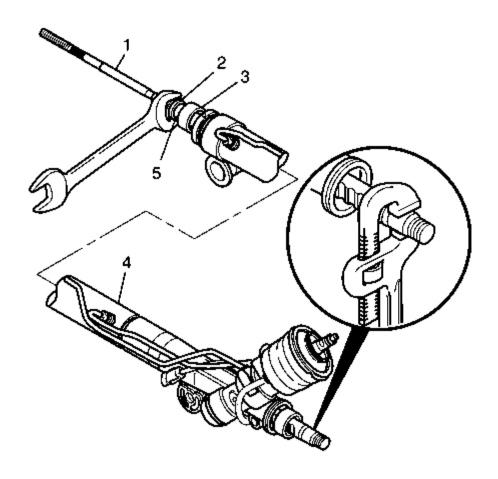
View of Shock Dampener, Inner Tie Rod Housing, Rack and Inner Tie Rod Courtesy of GENERAL MOTORS CORP.
